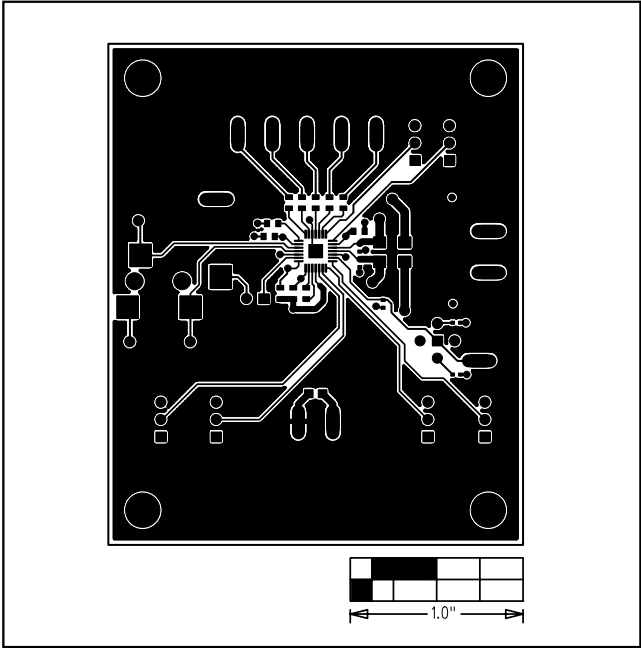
MAX9770 EV Kit PC Board Layout—Component Side
